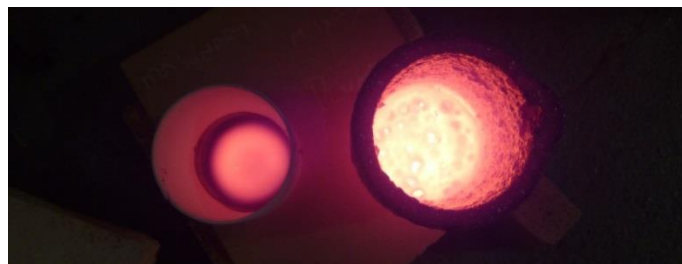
Crucibles allowed to cool in air once removed from the furnace
